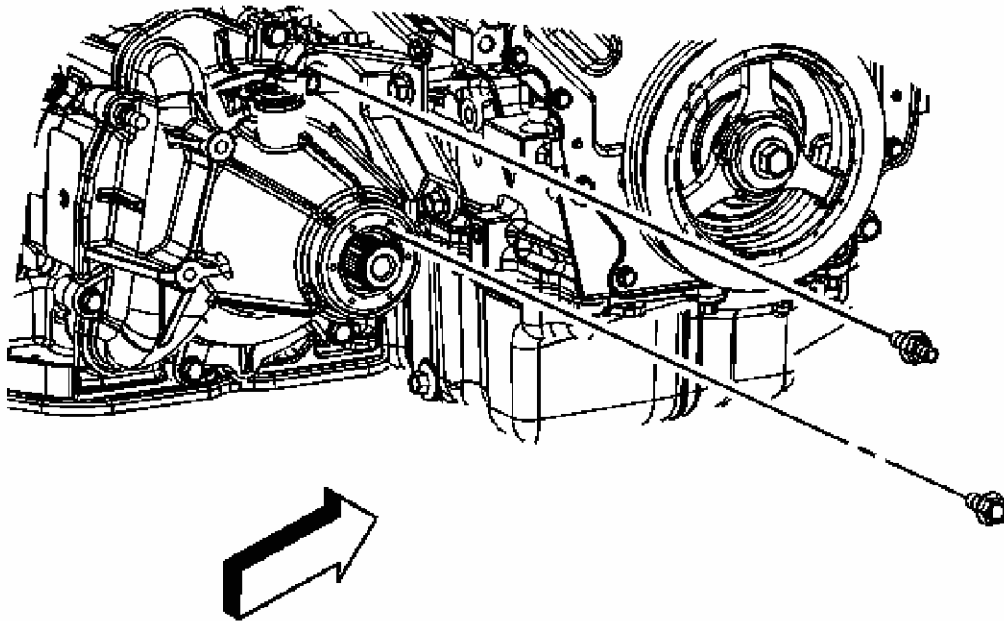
Identifying Transaxle Brace Bolt/Stud
